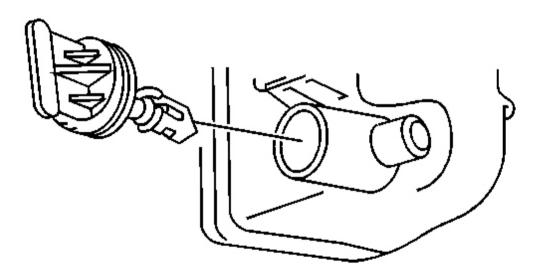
Radiator Drain Cock Courtesy of GENERAL MOTORS CORP.
